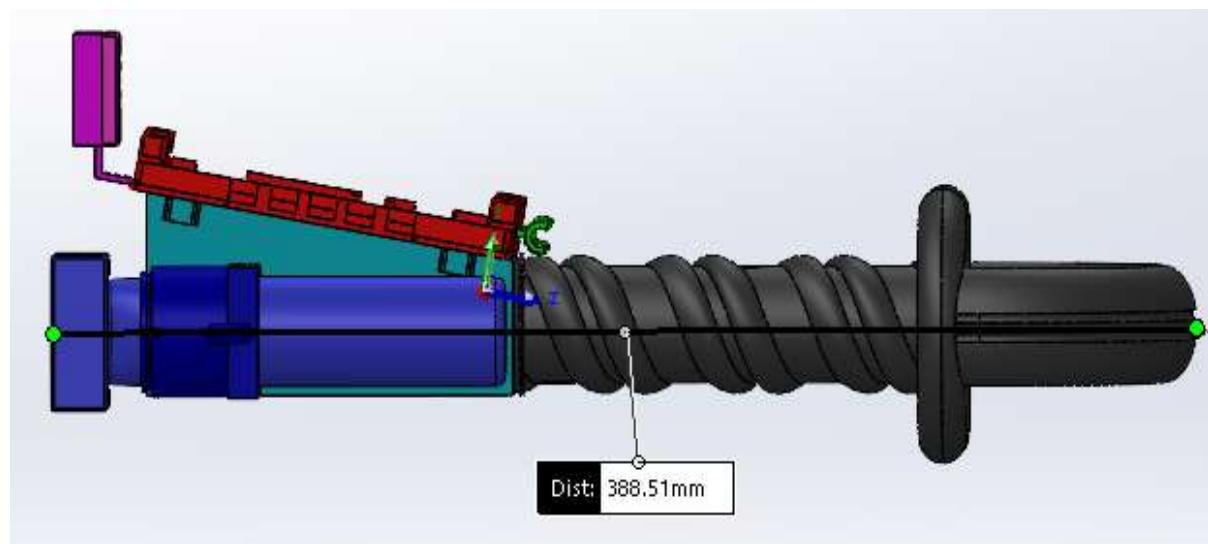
Final Assembled Design of product in Left view in SOLIDWORKS
